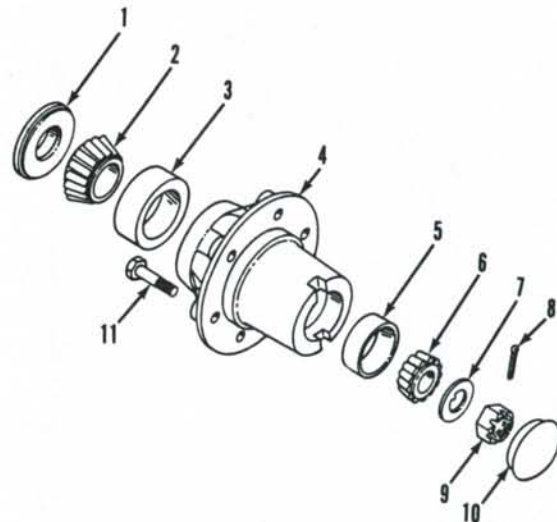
Exploded view of front wheel hub and bearings used on two-wheel drive models equipped with nonadjustable (cast) front axle. Refer to Fig. 1 for legend.
